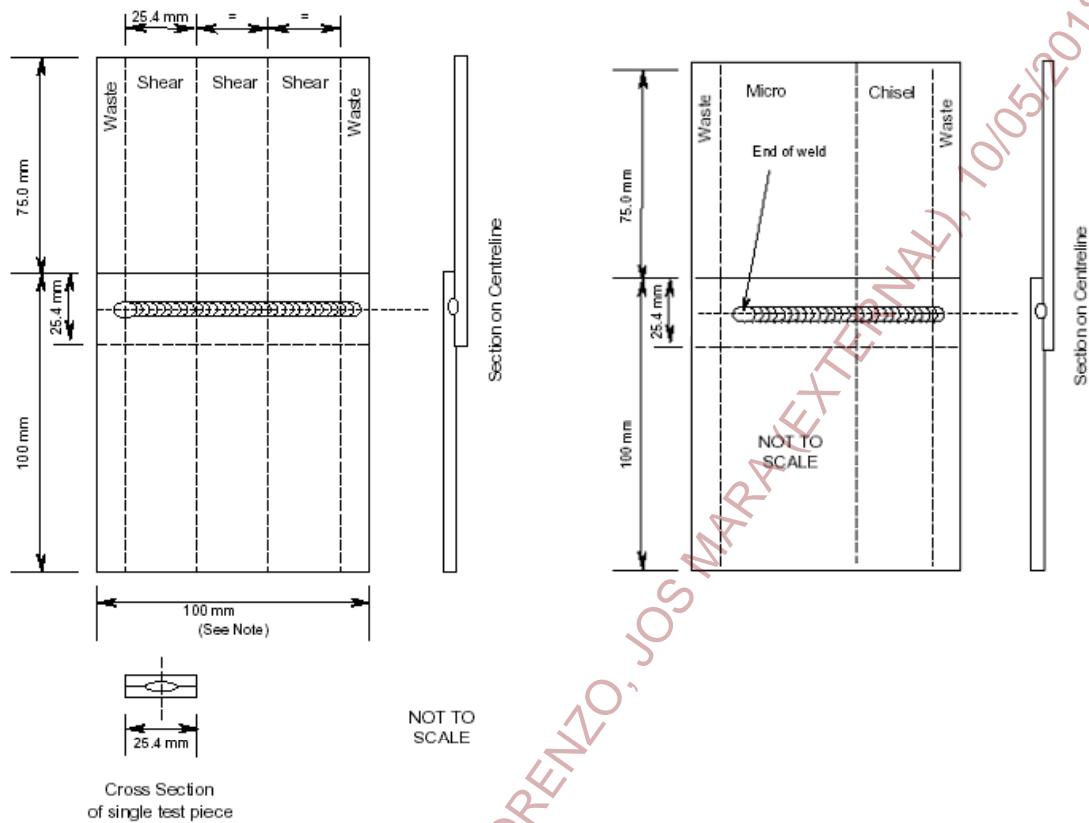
Seam in sheets. Shear/Peel/Chisel/Micro specimens
